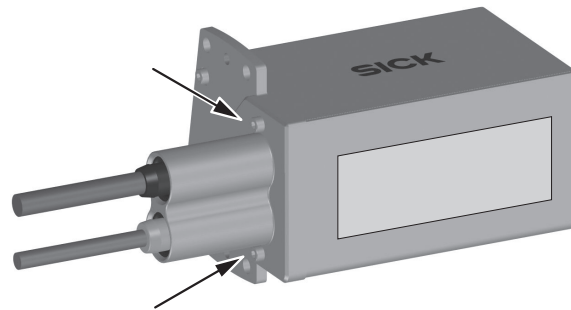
Assembly of IP69K protective housing, with use of the Ethernet connection – Step 4
